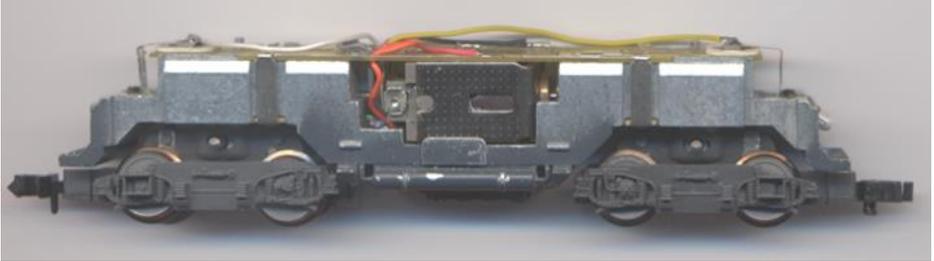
A space had to be milled in the chassis block to fit the decoder and wires.
